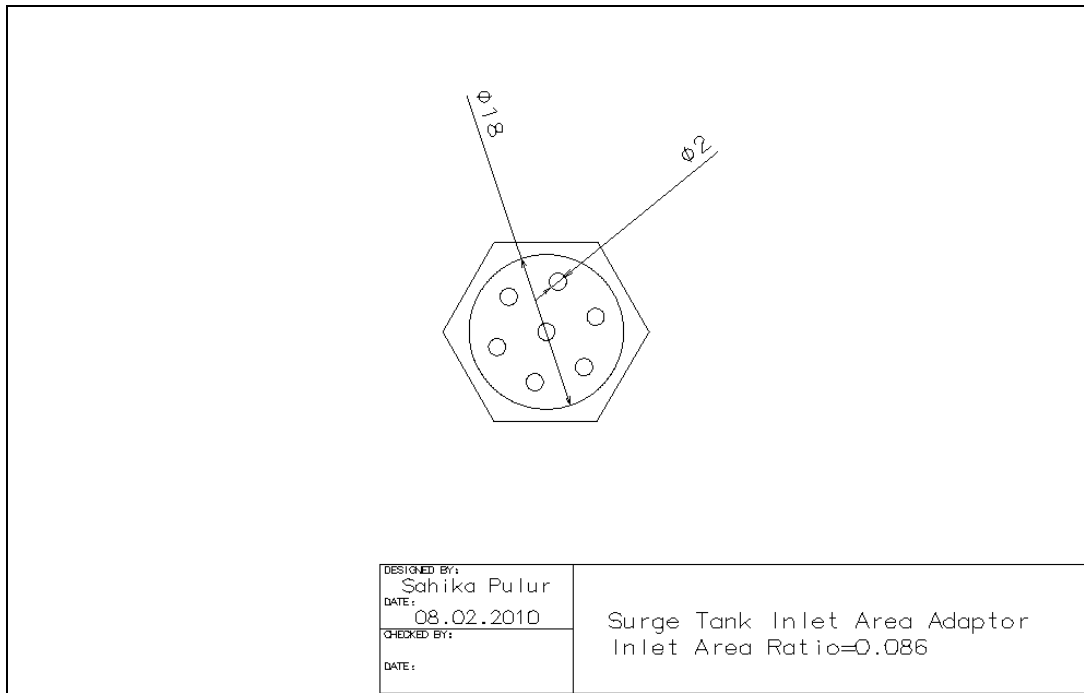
Technical Drawing of Adaptor with $r=0.09$
